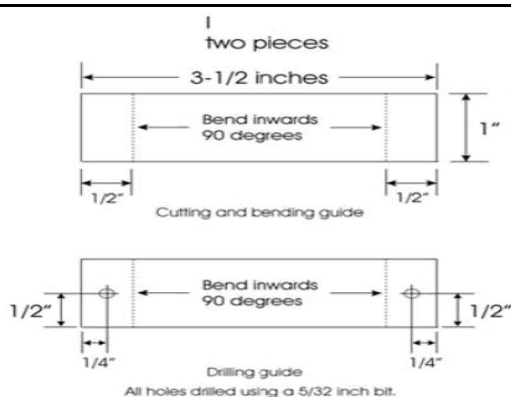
Cutting, drilling and bending guide for head support piece labeled I
